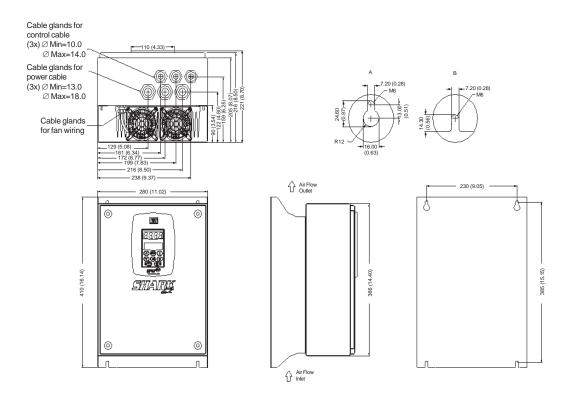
Mechanical data - Size 2, Dimensions mm (in)
